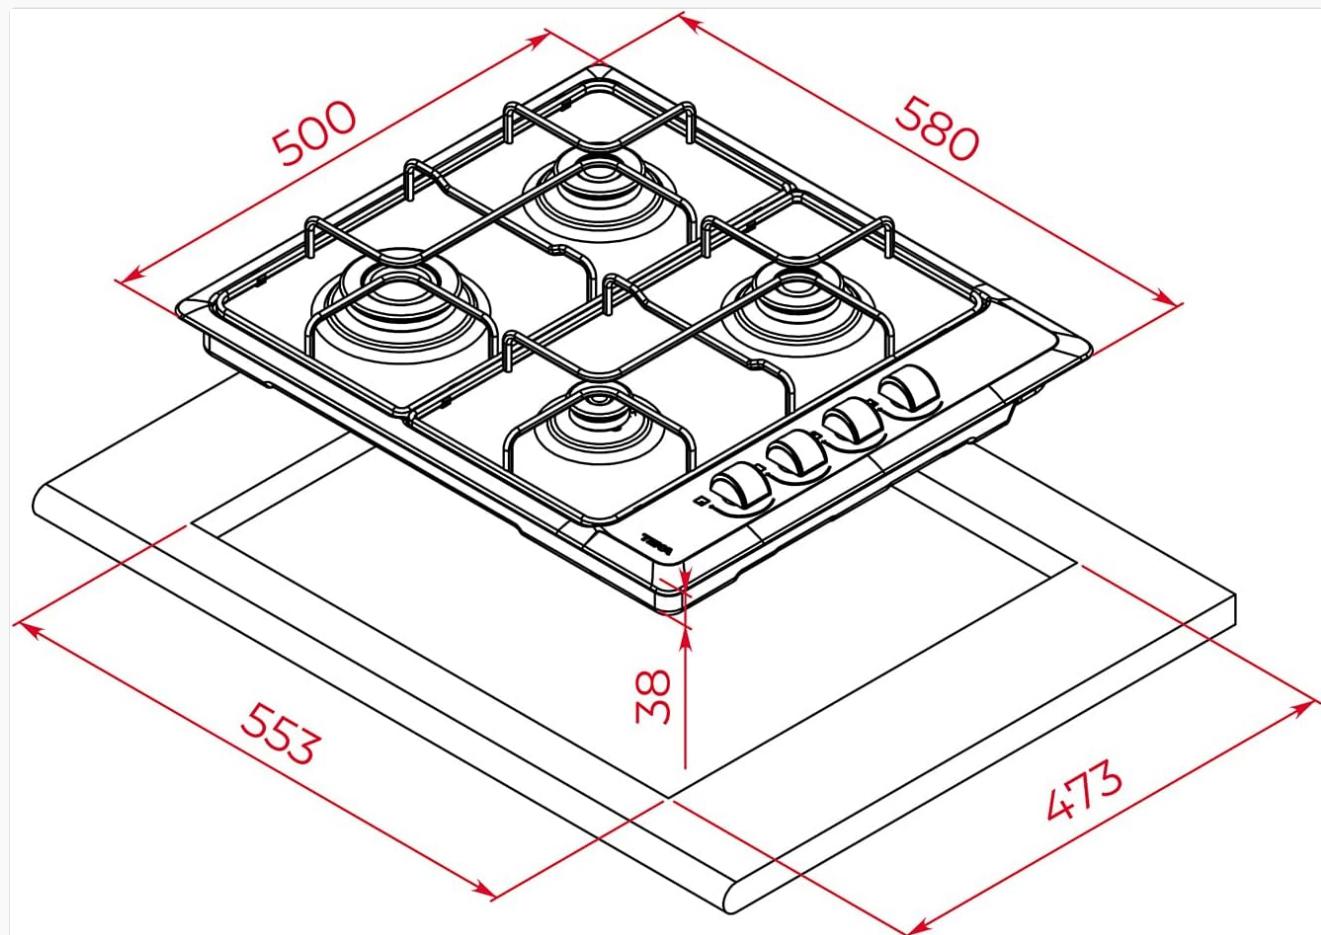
Technical drawing showing the dimensions of the Teka 4-Burner Natural Gas Hob for installation. (Dimensions in mm: 580 width, 500 depth, 38 height from countertop, cutout 553x473)
